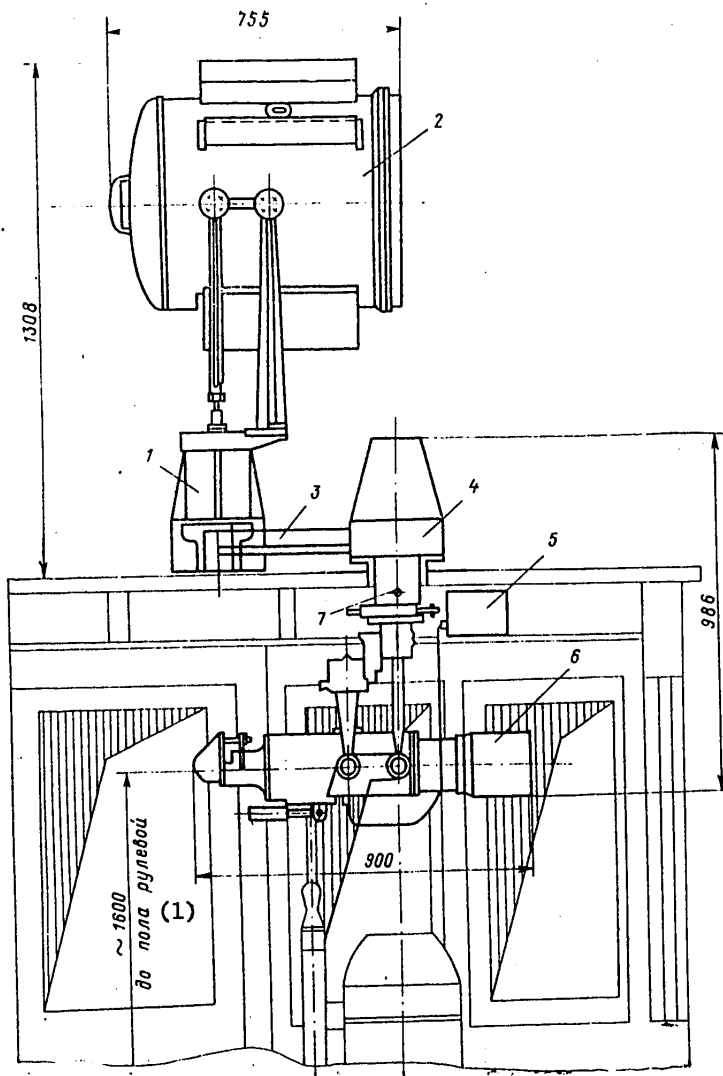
The "Mgla" equipment and its mounting position on a ship.
